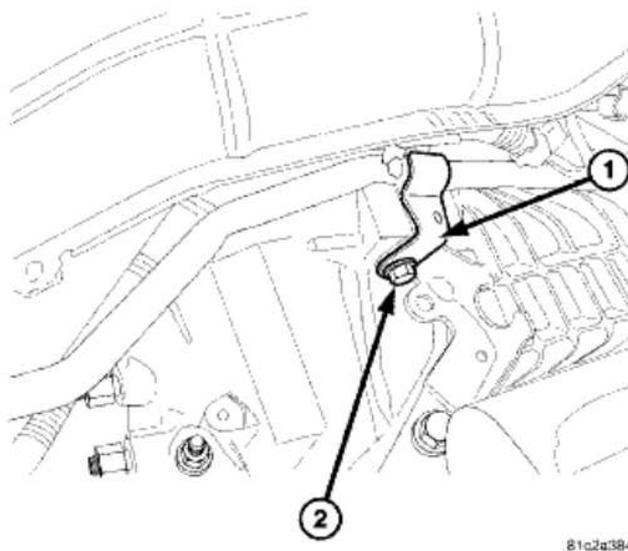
Identifying Shift Cable At Manual Valve & Cable Bracket
